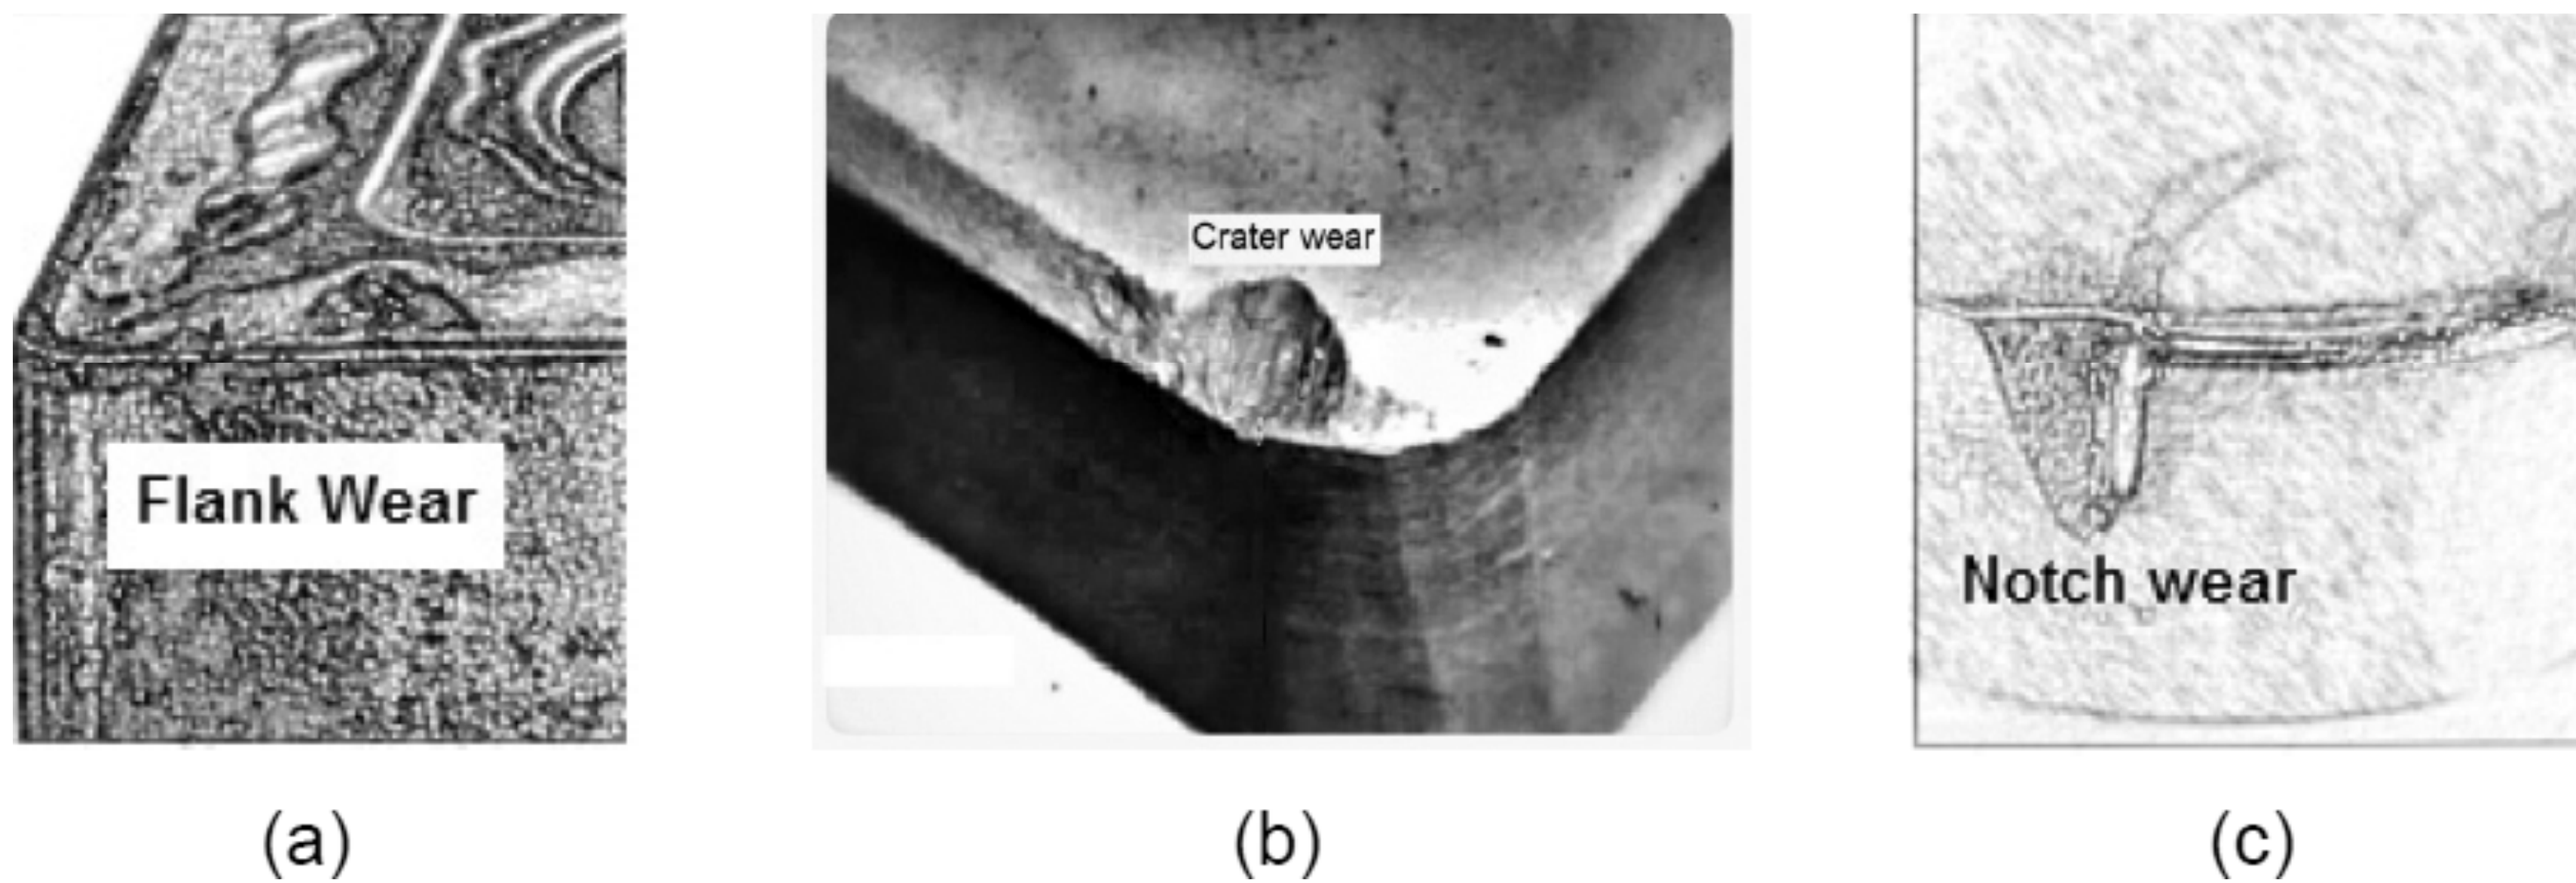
Sketches of (a) flank, (b) crater and (c) notch wear on cutting tools.
